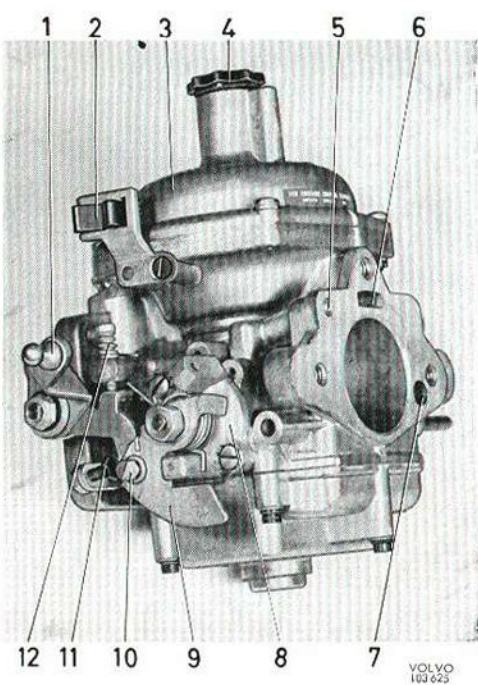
Stromberg-carburetor, left side, B 20 A
